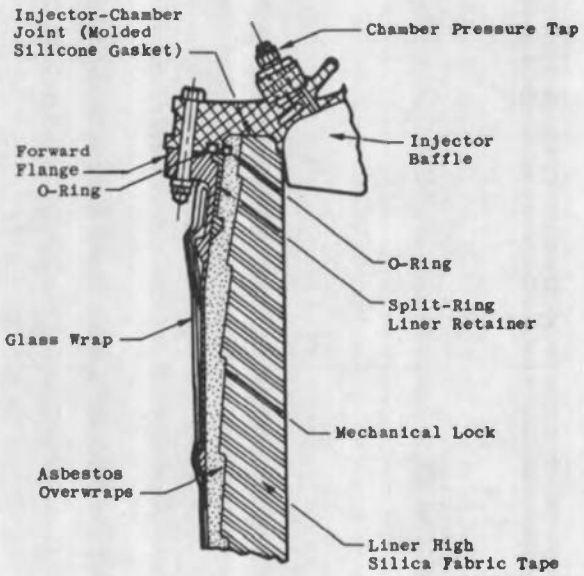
Combustion Chamber Flange Designs (Injector Interface)
